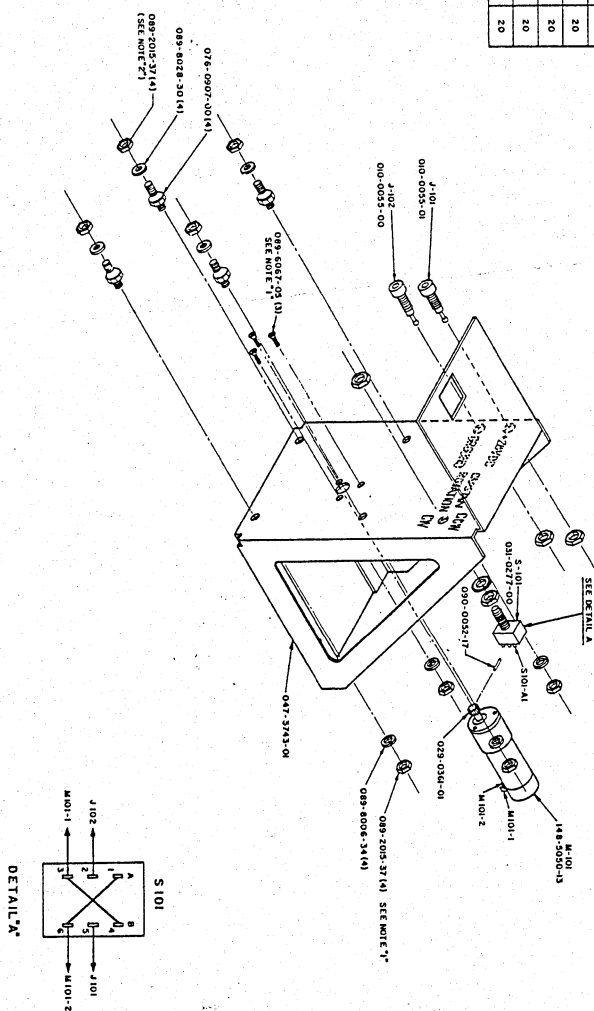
SLIP CLUTCH TEST STAND ASSEMBLY
